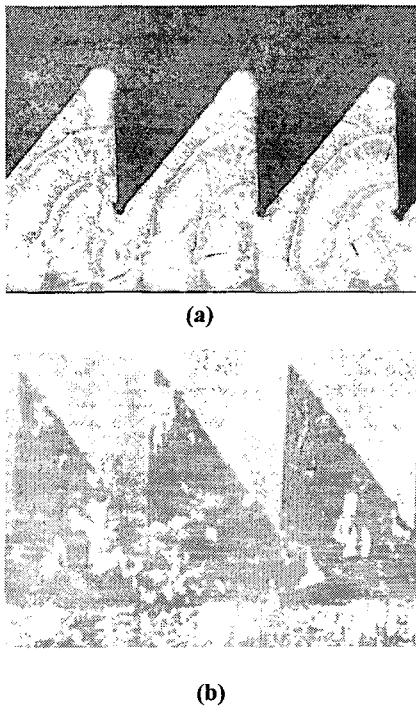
Micro scope image of cross section of (a) injection molded Fresnel lens and (b) UV-molded part
